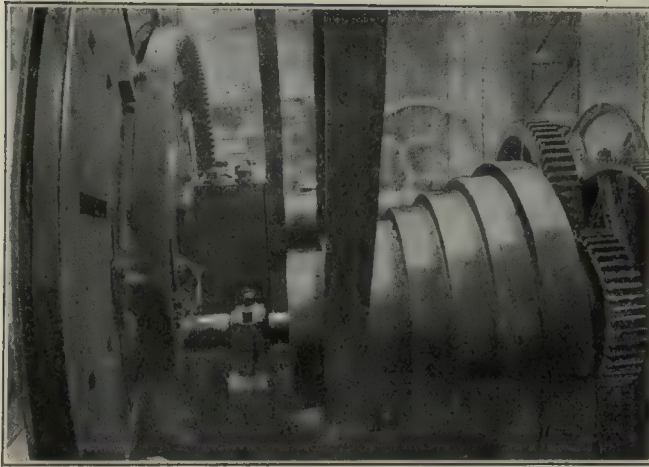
FACEPLATE DRIVE ON OLD PIT LATHE
